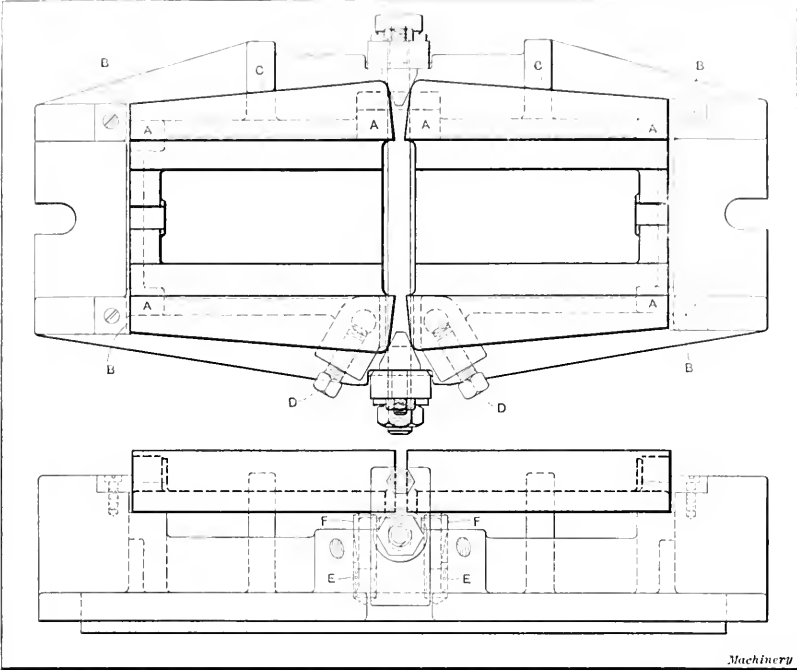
Method of supporting Work in a Jig that insures a Uniform Bearing
